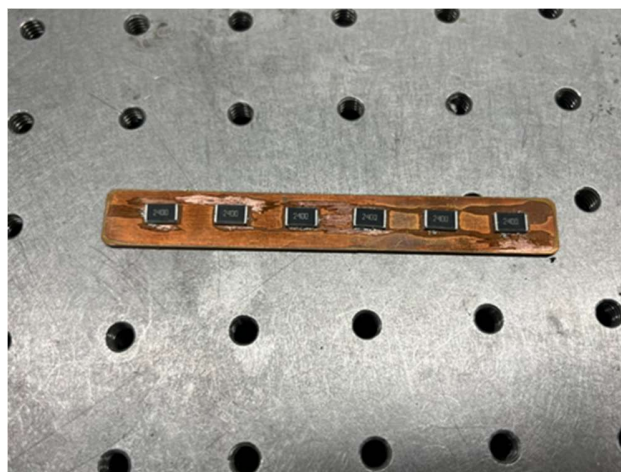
Fabrication of the copper heater assembly through resistor mounting
